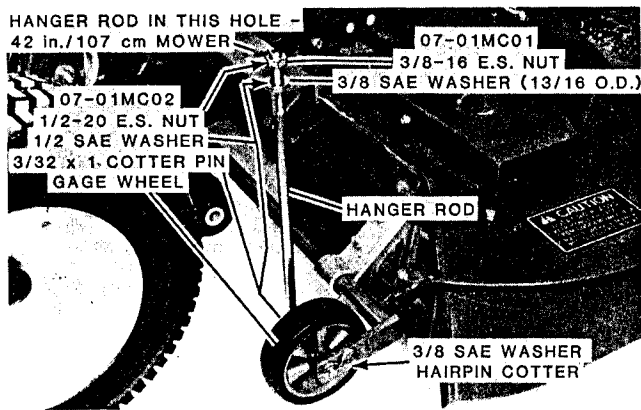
Install Hanger Rods (48 in./122 cm Mower Shown)
